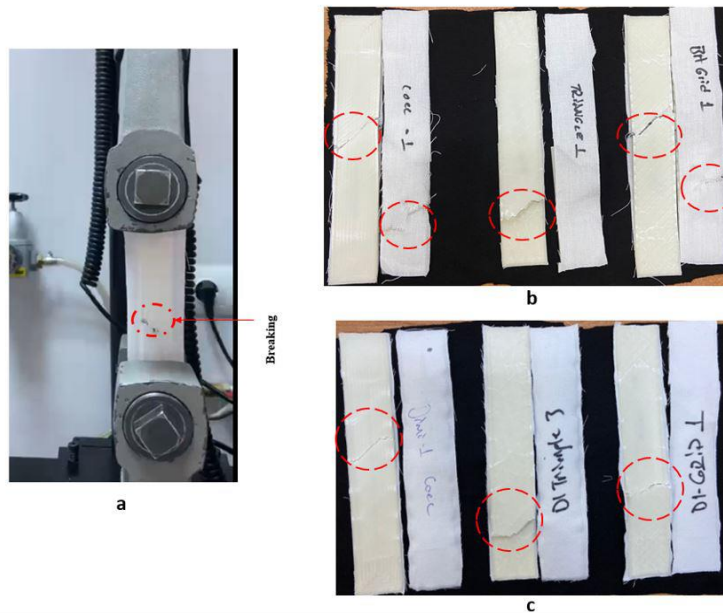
a) Tensile strength test, b) 3D parts printed onto the plain-woven fabrics after tensile strength test c) 3D parts printed onto the twill-woven fabrics after tensile strength test.
